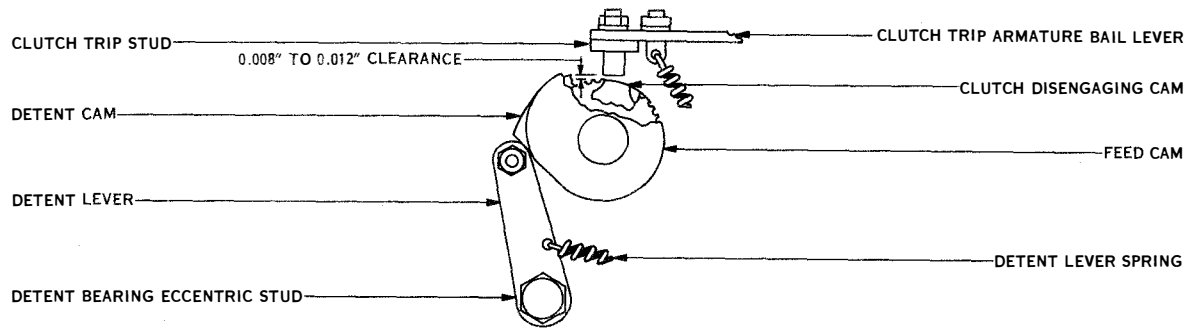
Feed-out Clutch Detent Eccentric and Trip Armature Bail Lever
